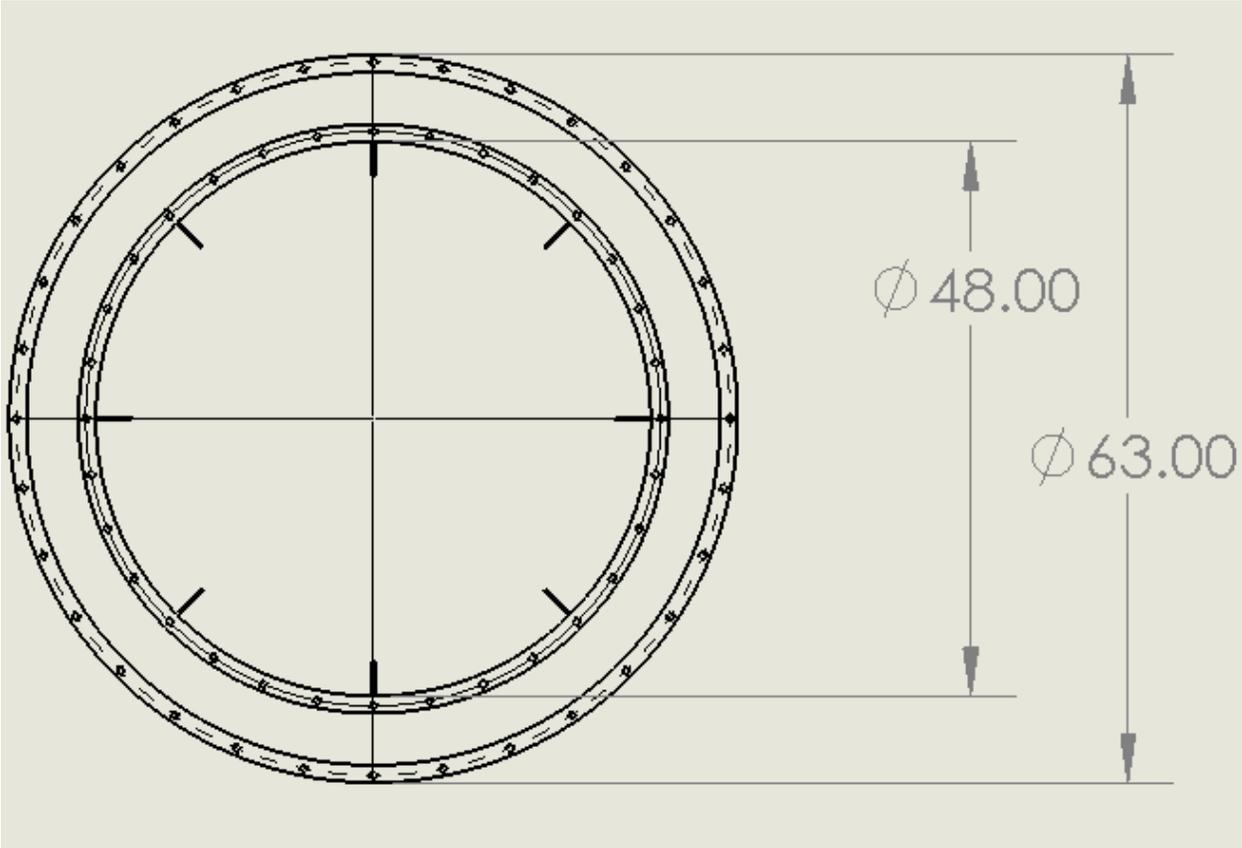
Drum sketch presenting the relevant dimensions for our analysis
